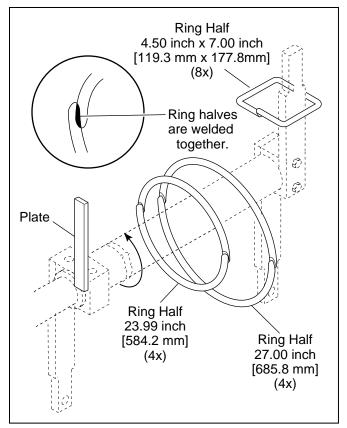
Blade Shaft Cleaning Ring Assembly
